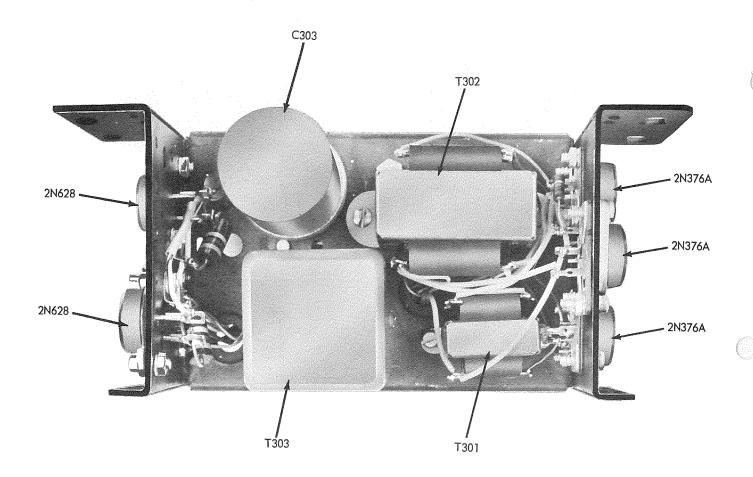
KS-501 Power Supply Modulator Top View, Cover Removed
